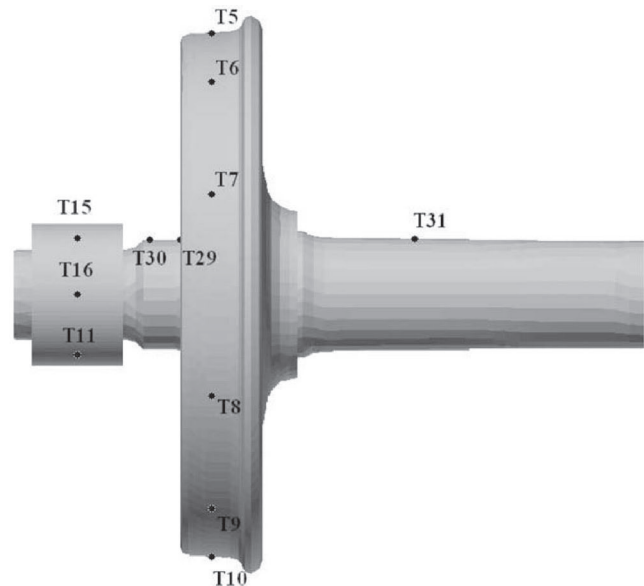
Schematic of the thermocouple locations on the wheel tread, bearing cup, and axle.
